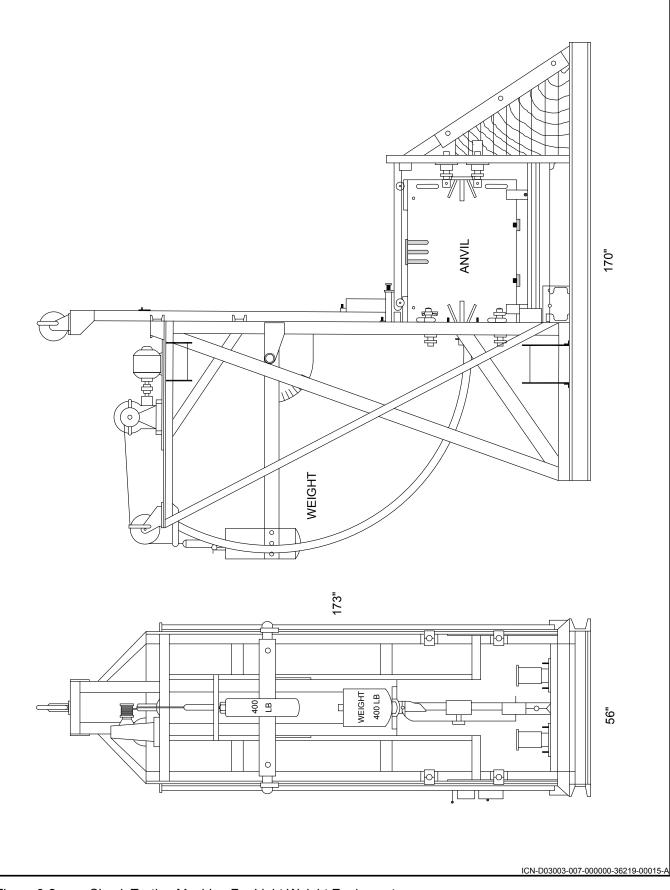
Shock Testing Machine For Light Weight Equipment
